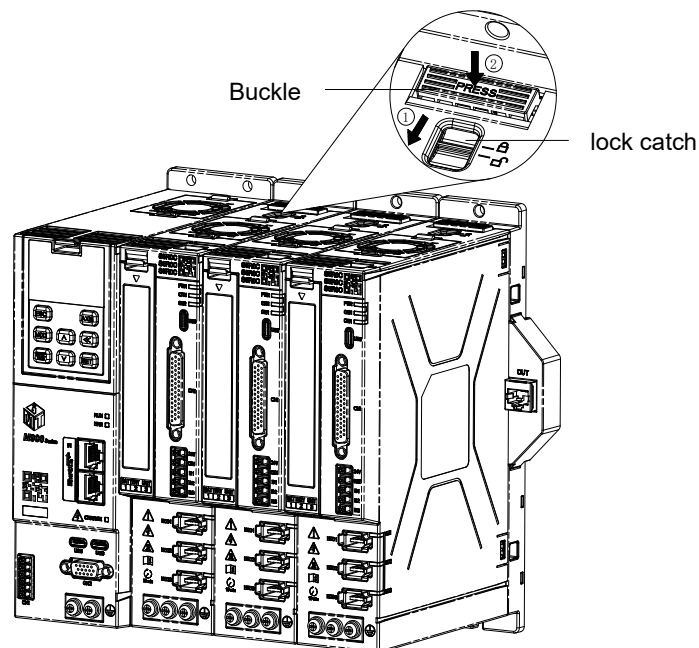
Unlock the lock buckle and press the bottom plate buckle
